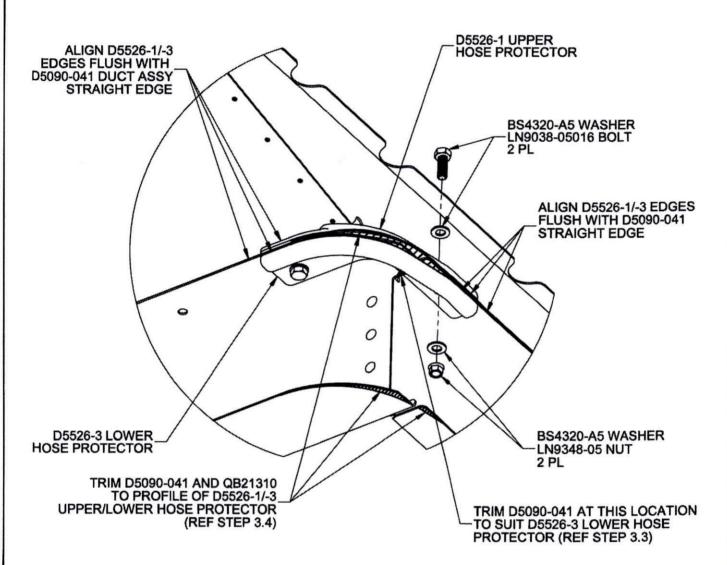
D5526-1/-3 Upper/Lower Hose Protector Installation
